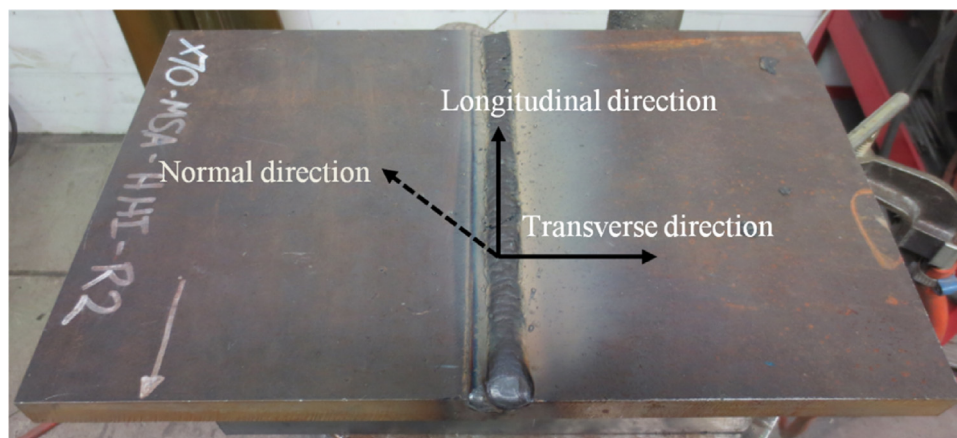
Welding specimen showing three directions of strain measurements.
